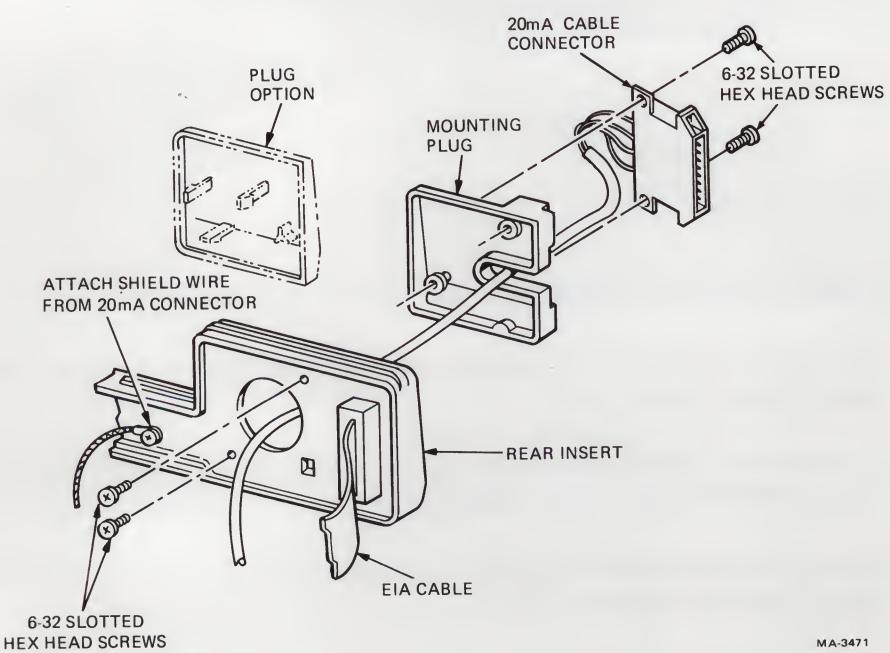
Attaching 20 mA Cable Connector to Rear Insert
